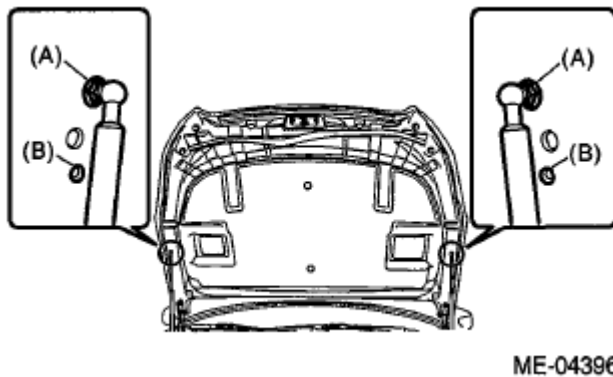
Identifying Front Hood Damper Bolt Mounting Position
